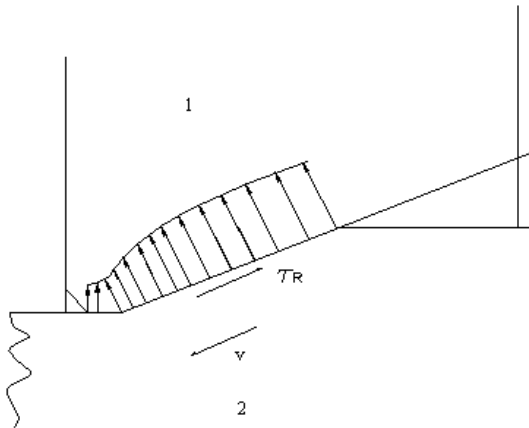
Die (1)-workpiece (2) interface – on the macro scale
